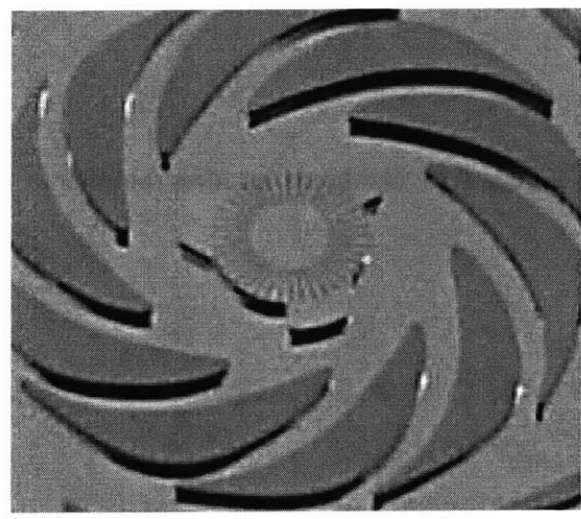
Close-up image of compressor wafer showing oxide bond pads on center hub
